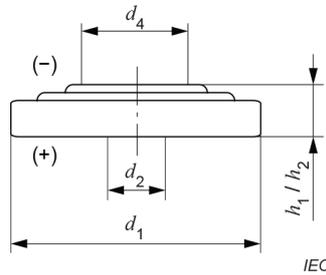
Dimensional drawing: CR1025, CR1216, CR1220, CR1225, CR1616, CR2012, CR1620, CR2016, CR2412, CR1632, CR2025, CR2320, CR2032, CR2330, CR2430, CR2354, CR2477, CR3032, CR2450, BR1225, BR2016, BR2320, BR2325, BR3032
